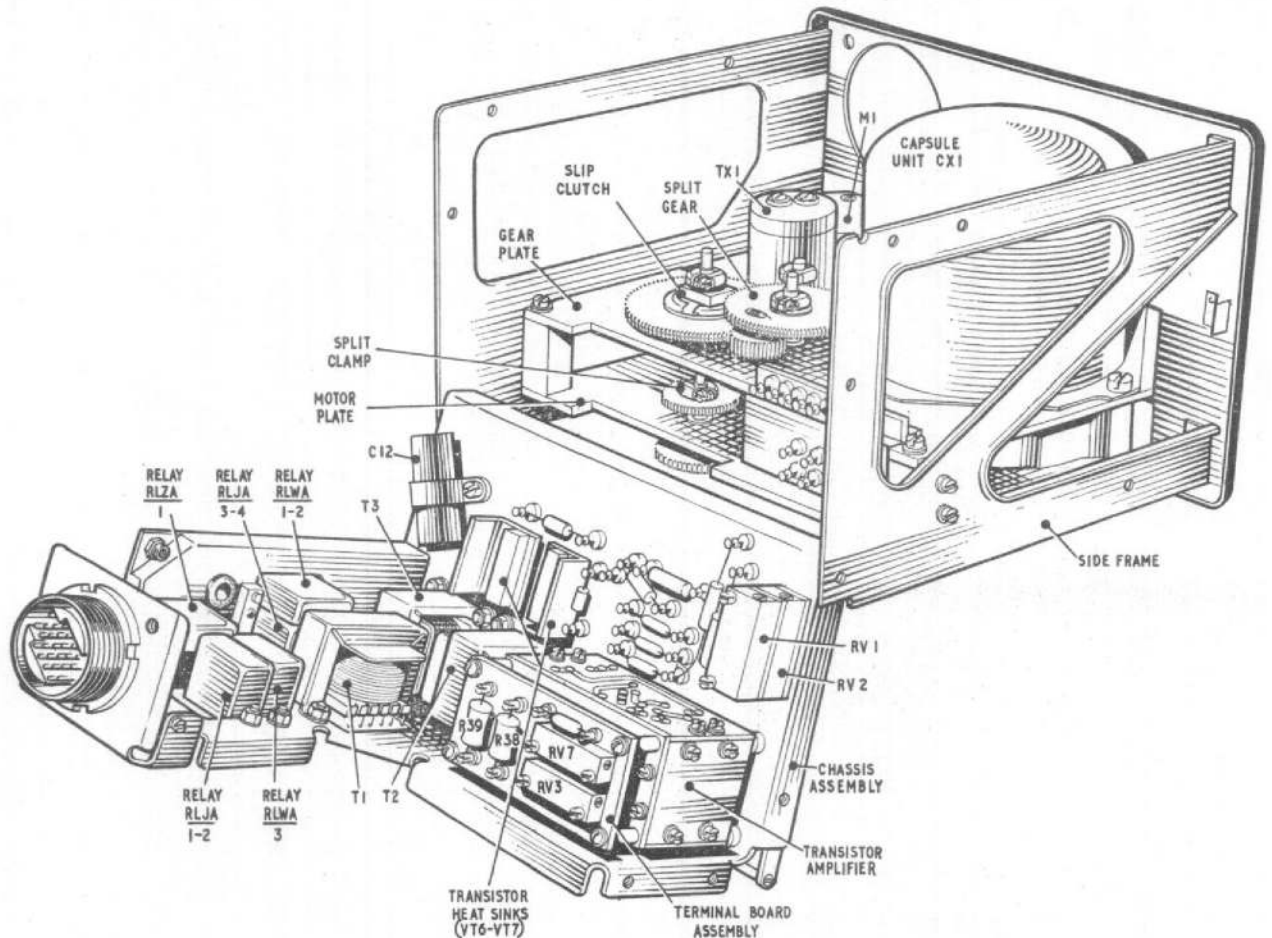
Height lock transducer, Type B — interior view with chassis fitted
